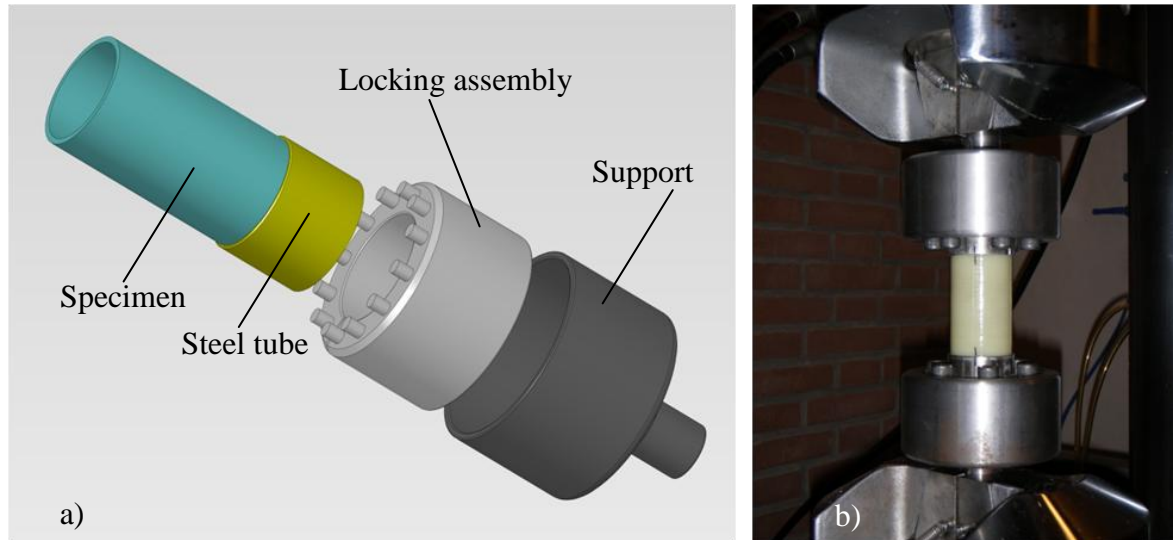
a) Schematic of the clamping system for type A tubes and b) tube installed on the testing machine
